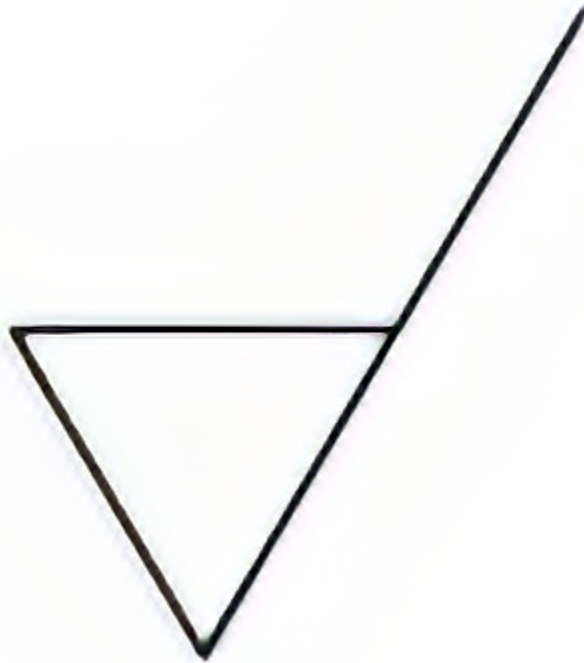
This symbol indicates machining is required to obtain the desired surface finish.
